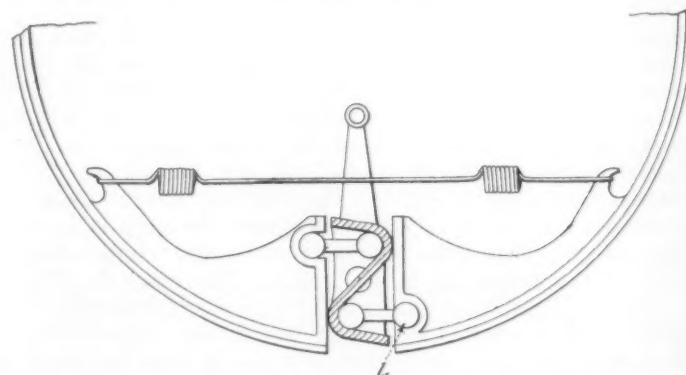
ENLARGED VIEW OF SIX-WHEEL-TRUCK BRAKE-CAM
